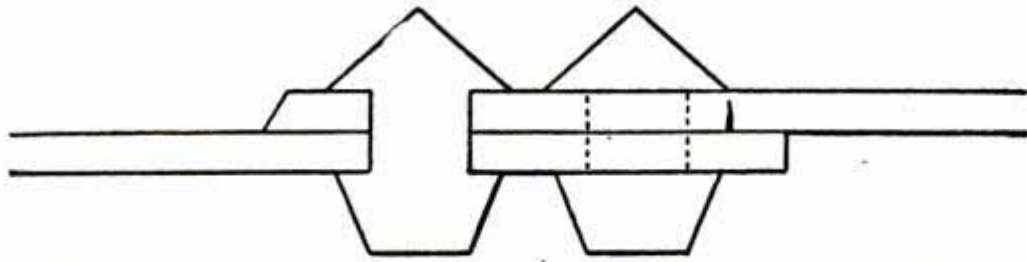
A LAP-JOINT CRACK UNDER THE OUTER EDGE OF THE RIVET HEADS.
